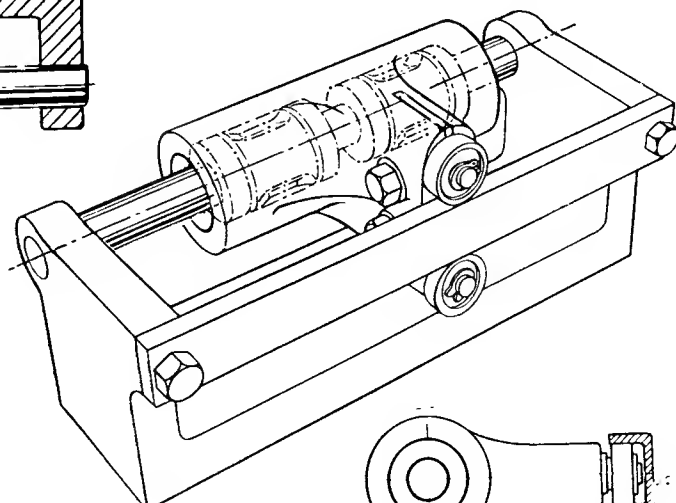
LONG AND SHORT PARALLEL SHAFTS
